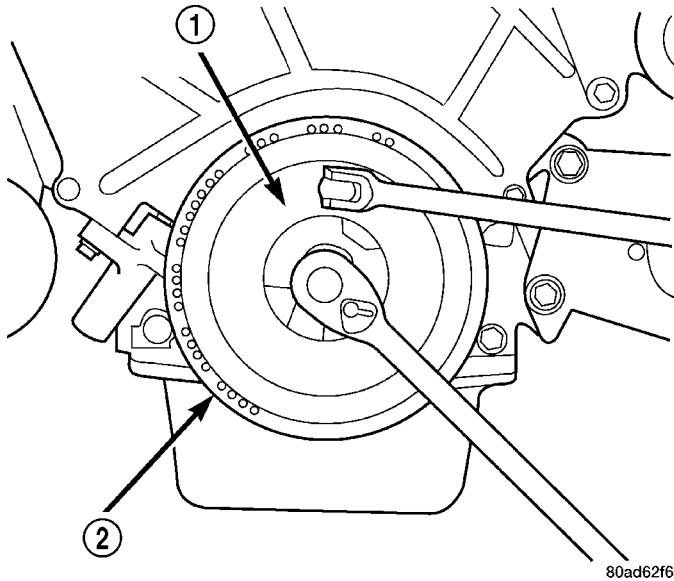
Crankshaft Damper Center Bolt - Removal and Installation
